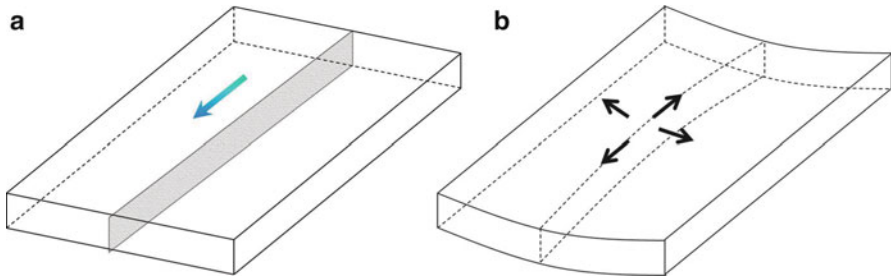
(a) Initial shape of the workpieces to be welded. The shaded region is the interface while the arrow shows welding direction. (b) Final shape of the workpiece due to residual stress. The deformation in shape during welding is complicated by the clamping forces
